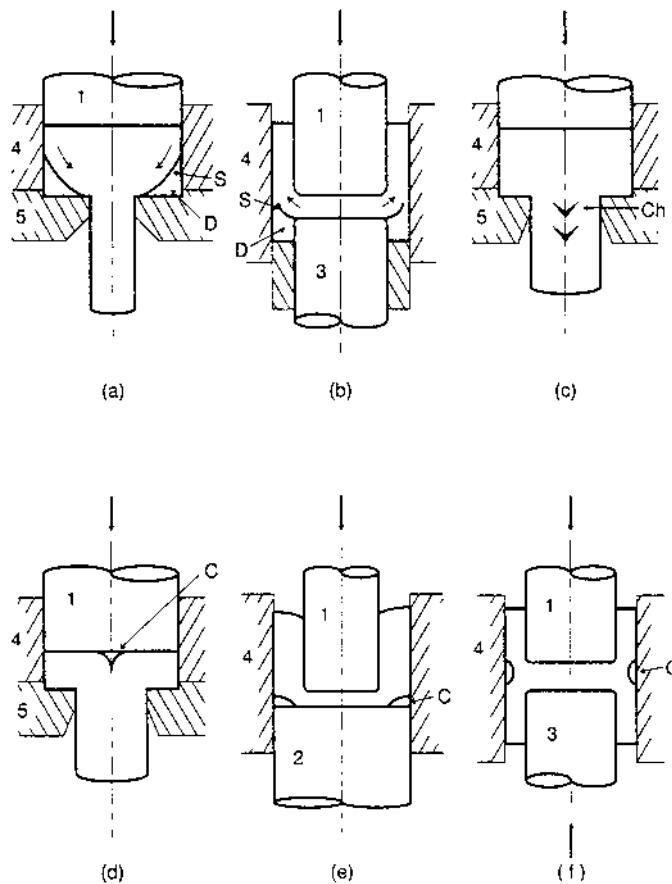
Forging defects, 1. Punch, 2. Backup punch, 3. Counter punch, 4. Container, 5. Die, D. Dead metal, S. Skin, C. Contraction. (a) Dead metal; (b) Skin inclusion; (c) Sheveron crack; (d), (e), (f) Contraction.
